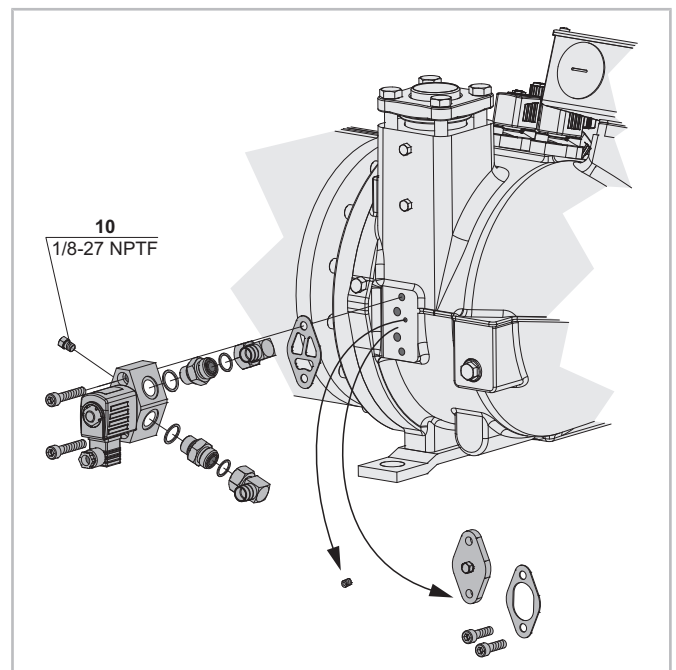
CSH(P)65 and CSH(P)75: Install oil cooler, illustration with control valve
